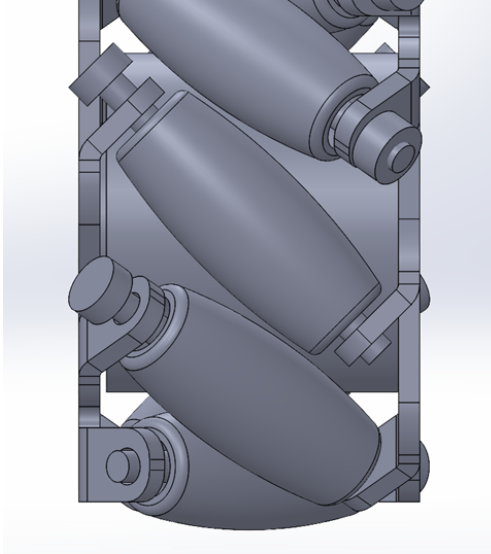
CAD Model of Mecanum Wheel Interference Inspection by John McClain
